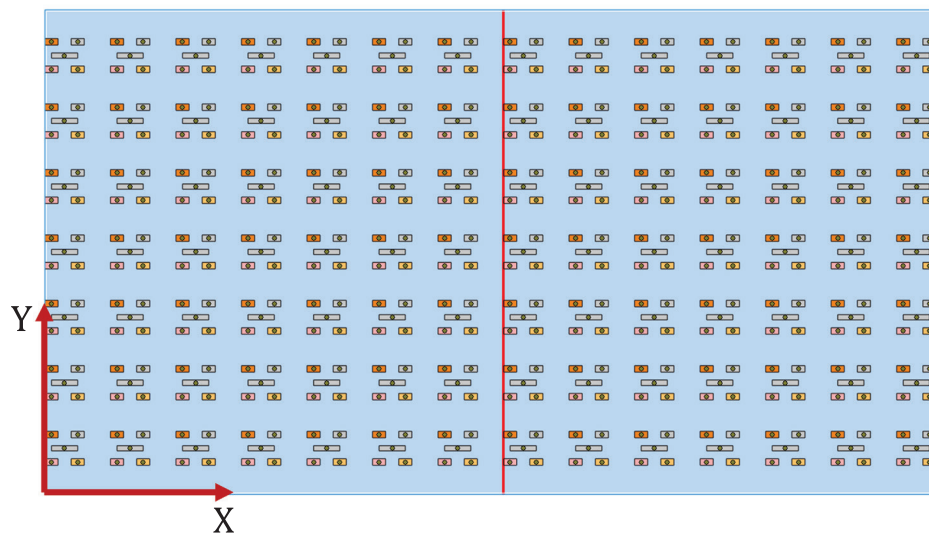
Corrected and centred grid arrangement for test specimens in ZX direction for an example machine during powder bed fusion (build area size 700 mm × 380 mm)
